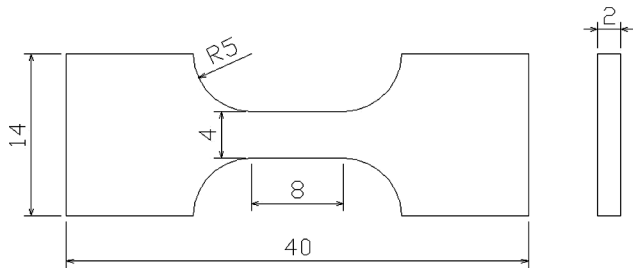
Dimensions of specimen for macroscopic tensile tests.
